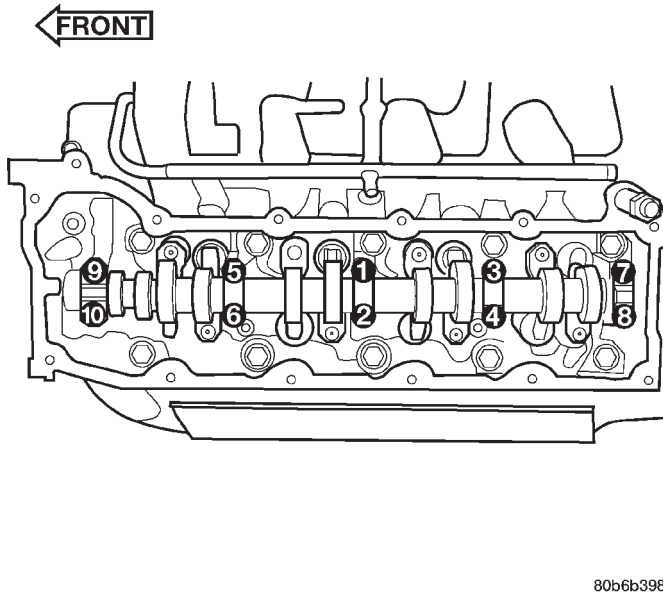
Camshaft Bearing Caps Tightening Sequence
